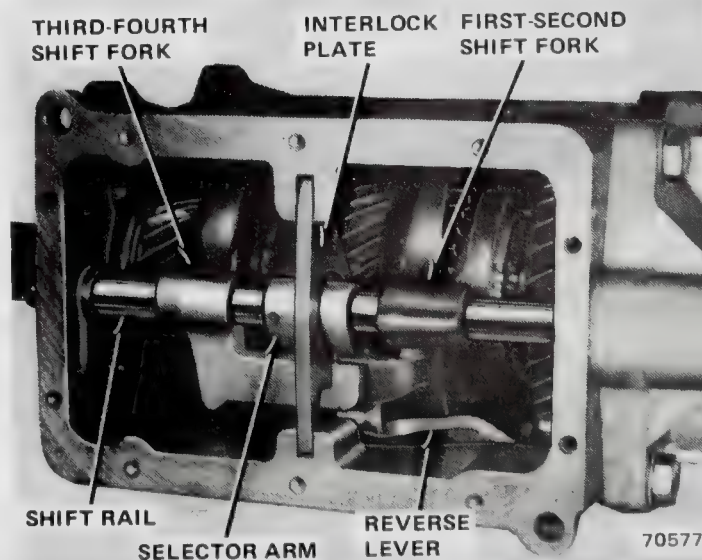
B-50 Assembled Position of Shift Mechanism Components
